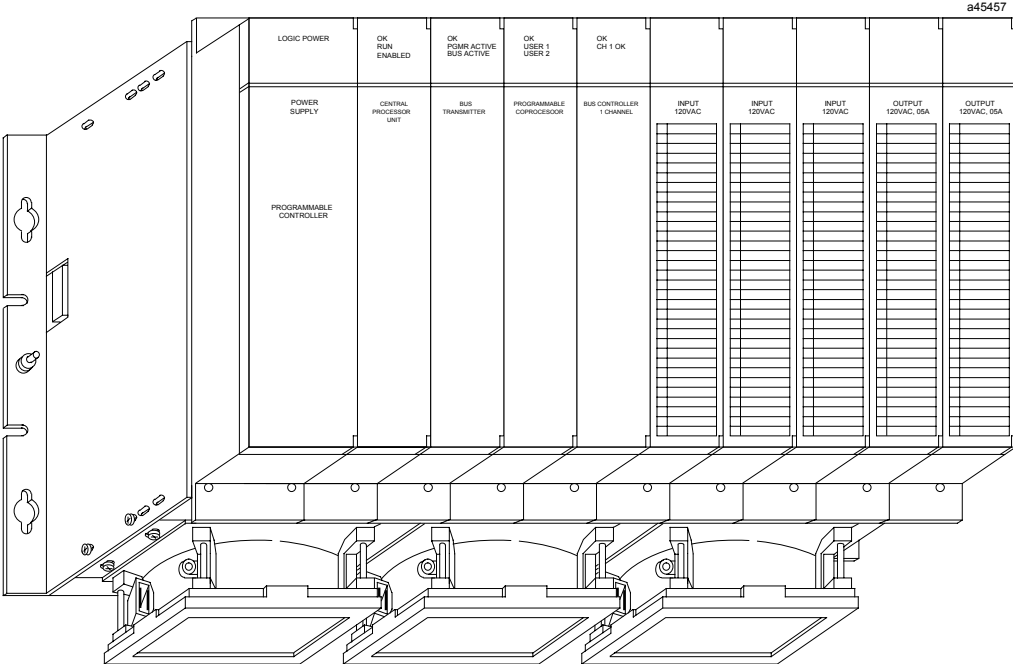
Typical Fan Assembly Mounting (AC Type Fan Assembly Shown)
